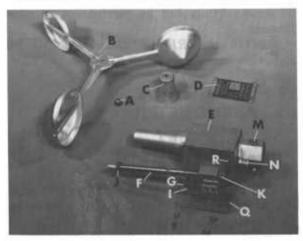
Small Airways type anemometer: A, Cap nut; B, cups; C, rain shield; D, front cover plate; E, housing; F, spindle with worm gear; G, contact assembly; H, worm gear; I, worm wheel; J, upper ball bearing; K, lower bearing adjustment screw; L, thumb clamp screw; M, grounded terminal; N, insulated terminal; O, spindle retaining screw; P, mounting sleeve; Q, back cover plate; R, binding post screw; S, contact points; T, contact fingers.
